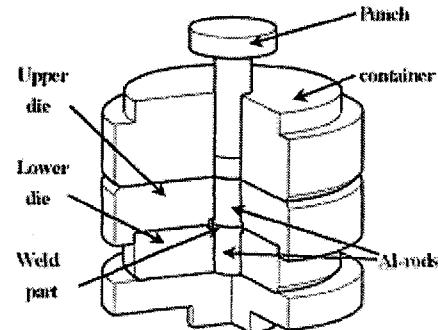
Die Assembly of hot extru-pressure welding
